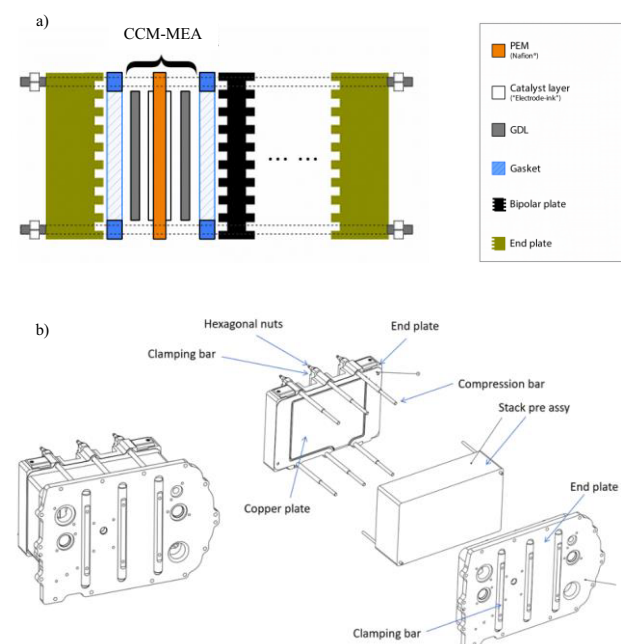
a) Membrane Electrode Assembly (MEA) main components. b) PEMFC stack assembly final step manufacturing. Adapted from (6)
